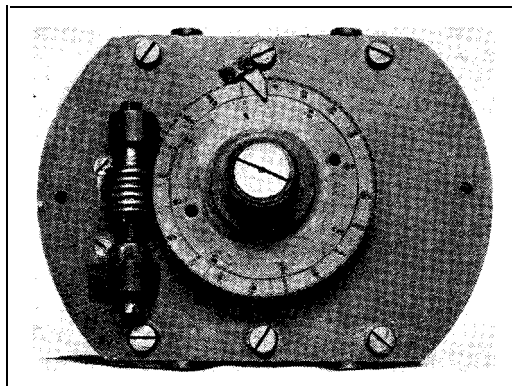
Front View of the Oval Chuck, showing Worm Gear Adjustment.
